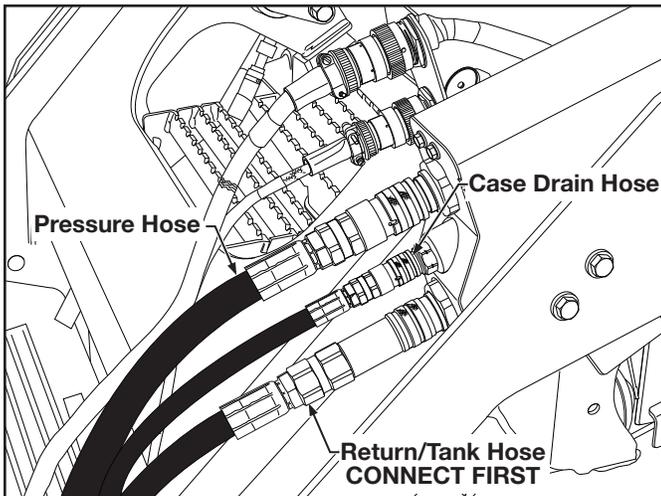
Hydraulic Hose Connections to Skid Steer
